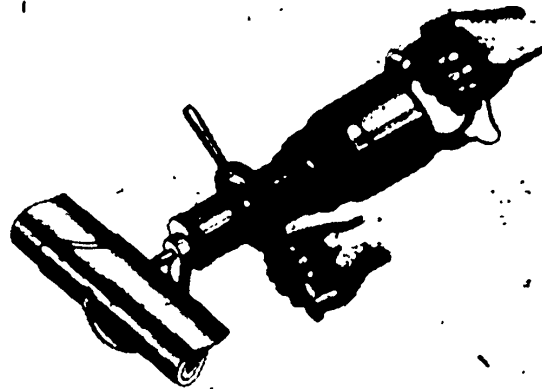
Drilling Holes in Steel Tubes with a Pneumatic Hand Drill
